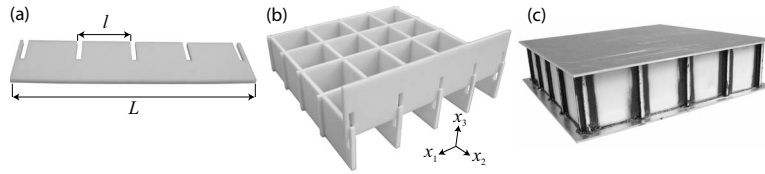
Photographs a specimen with $l=75$ mm and $t=0.6$ mm demonstrating the manufacturing technique: (a) a waterjet machined panel, (b) the assembling technique, and (c) the final product
